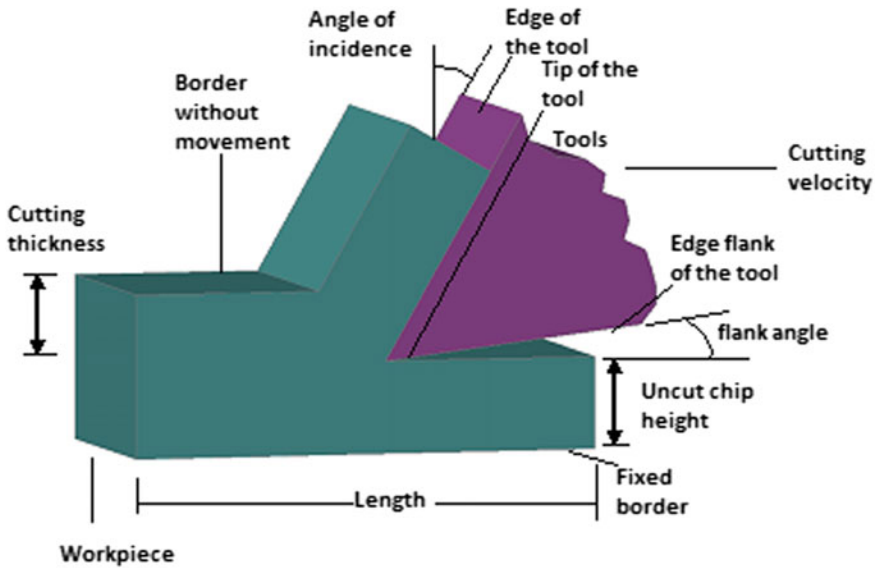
Orthogonal 3D cutting process where the tool and the workpiece are shown
